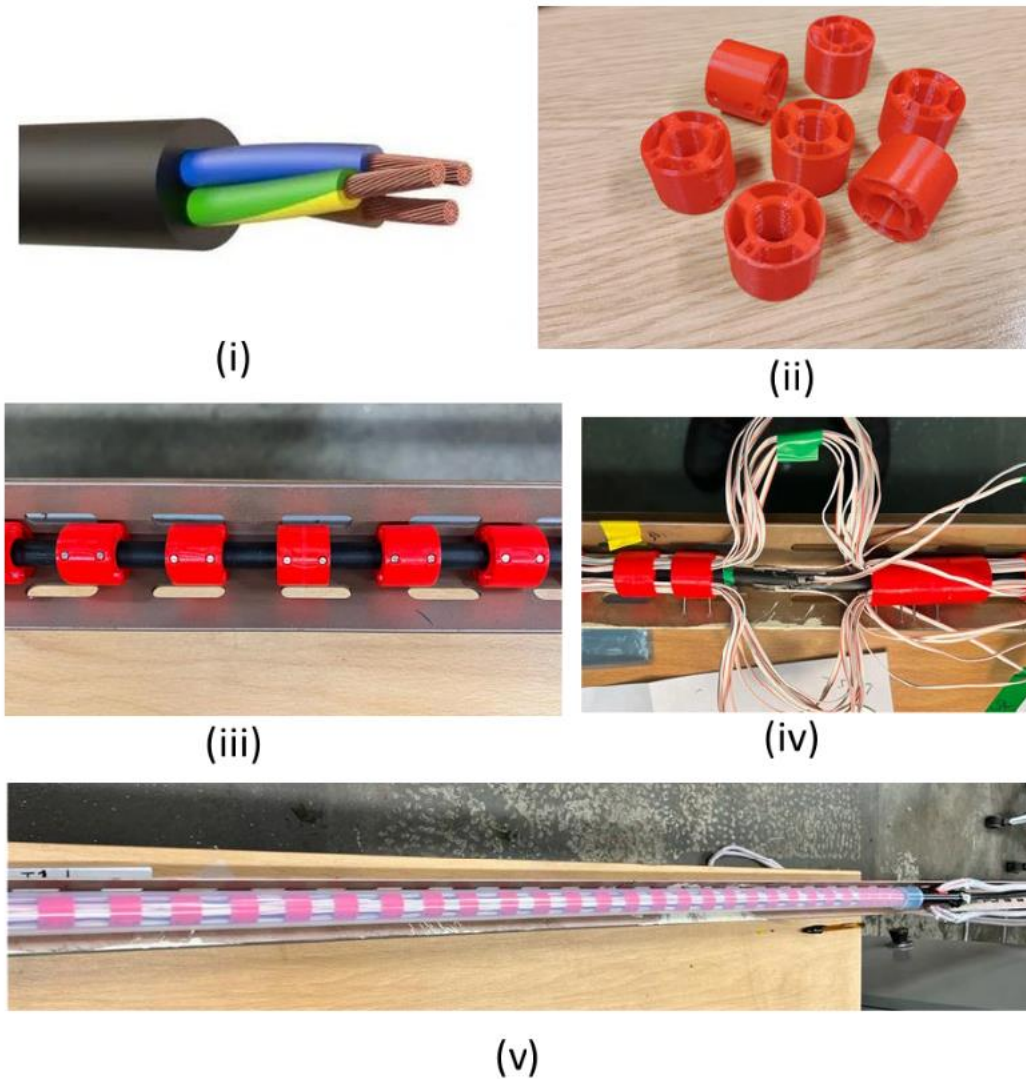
Cable internal components (i) inner core cable (ii) 3d printed spacers (iii) spacers fixed on the inner cable (iv) strain gauge fixing at individual locations (v) cable setup inside the silicon tube (EPSRC CableDyn Project, 2022)
